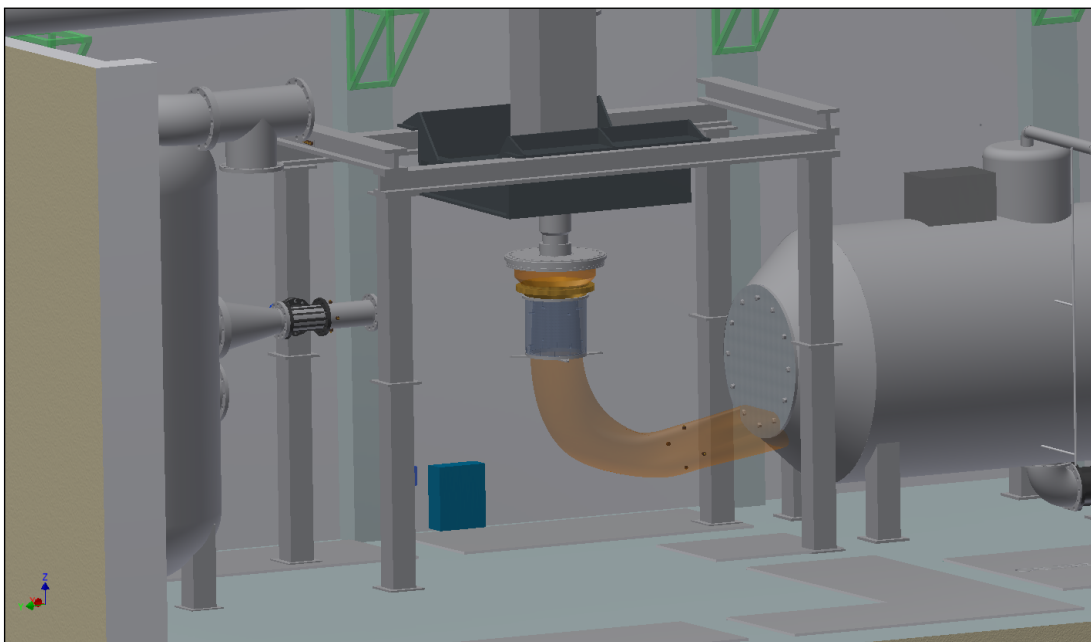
Close-up view of the support structure with turbine and generator.
